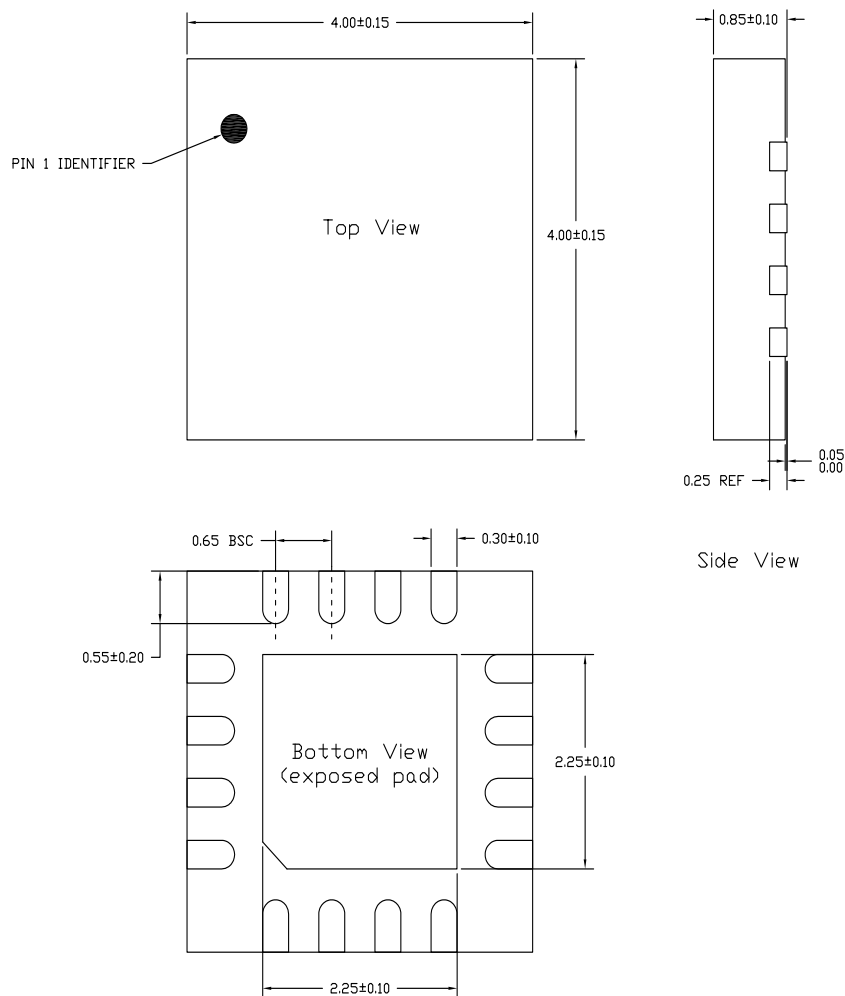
QA Package Dimensions and Pinout (all dimensions are in millimeters)
